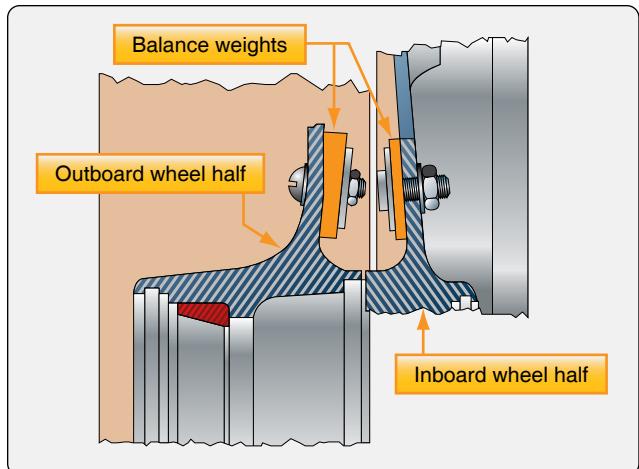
Two piece aircraft wheels are statically balanced when manufactured and may include weights attached to each wheel half that must stay with the wheel during its entire serviceable life.
